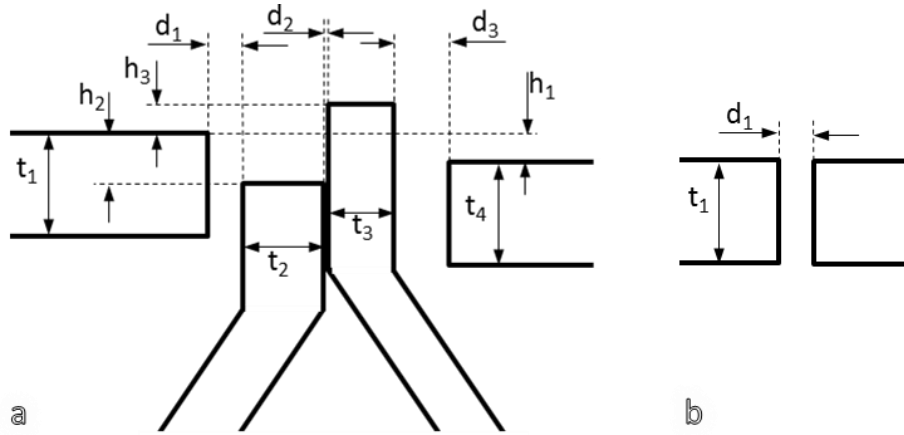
Multiple butt joining with alignment errors and positioning tolerances: a) for the configuration shown in figure 46, b) for the configuration shown in figure 45.
